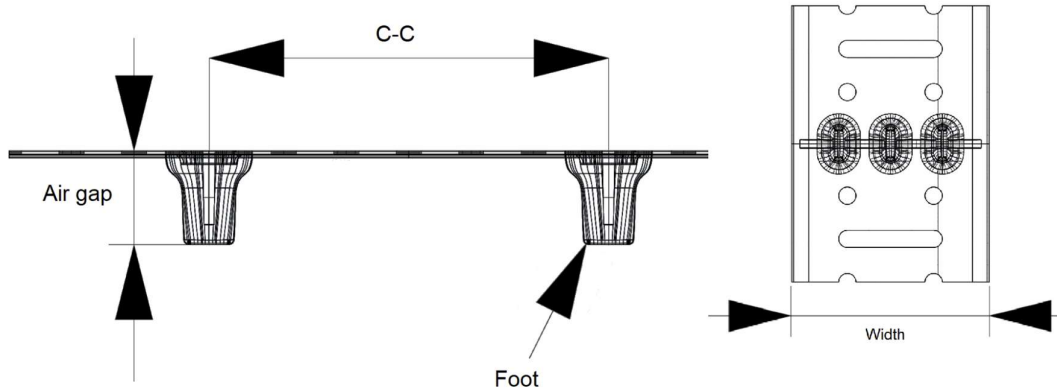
Dimensions and component naming for ESSGE NCS Spacer Band HT.
